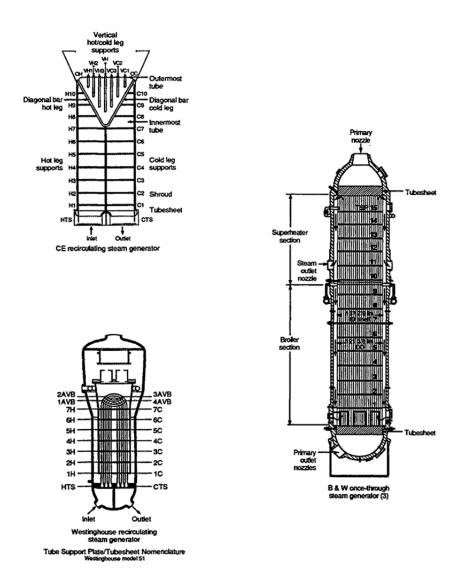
Typical steam generator tube support layouts with tube support plate and tube sheet nomenclature.
